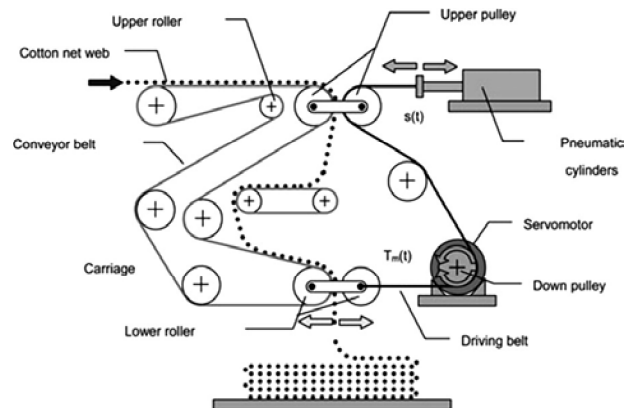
Working mechanism for the new cross-lapper machine of horizontal type [21]
